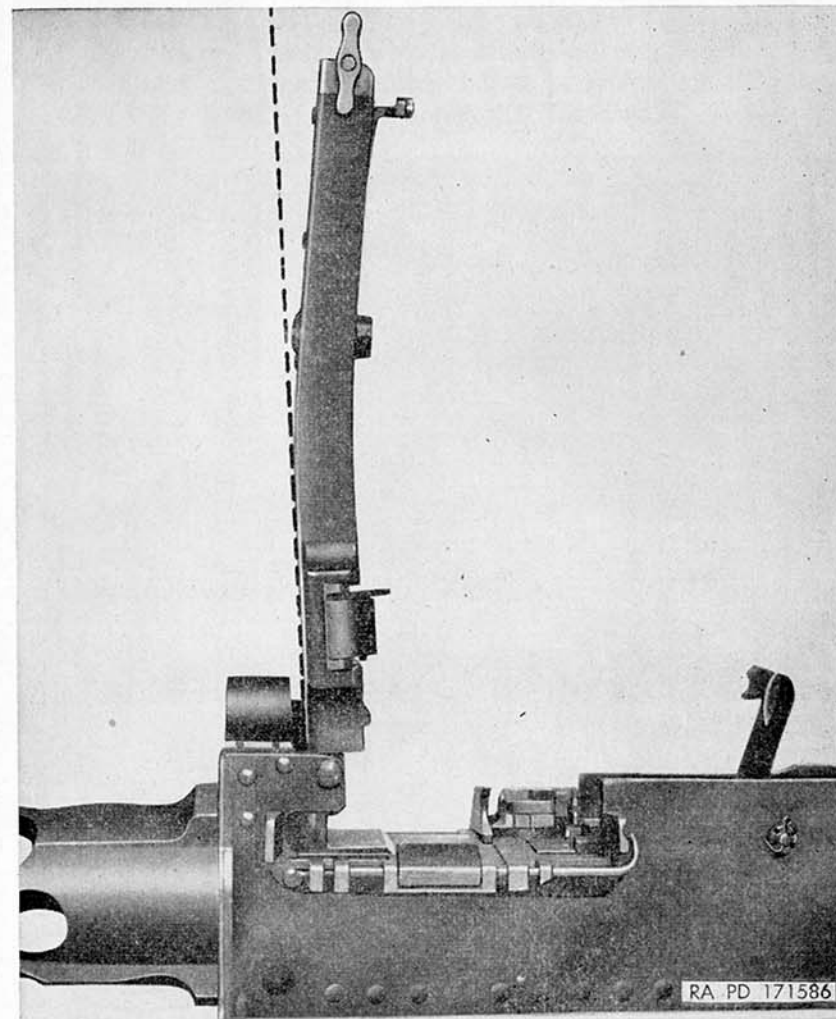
Cal..50 machine gun damaged by firing with excessive head space.
